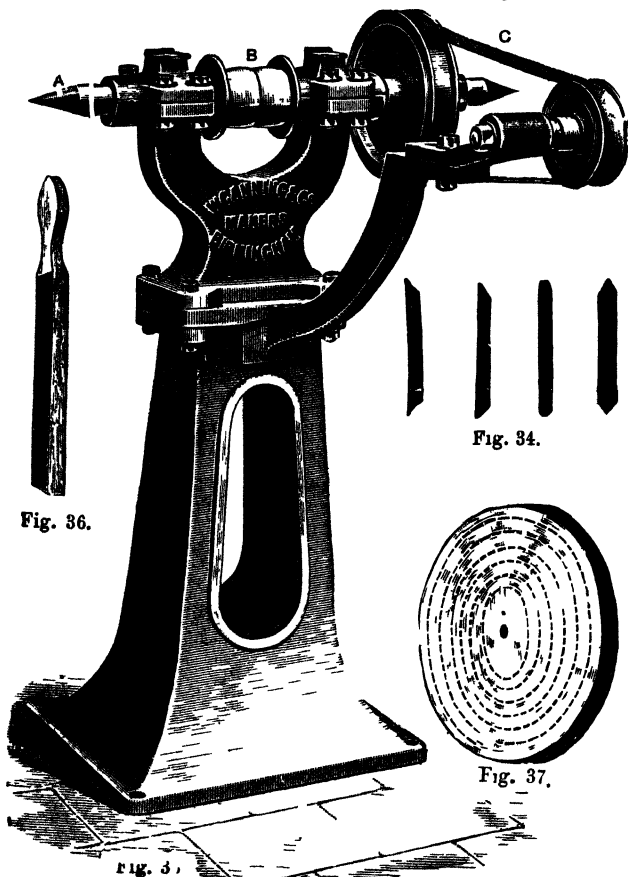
Sections of Bobs. Fig. 35.—Emery Tape Machine
